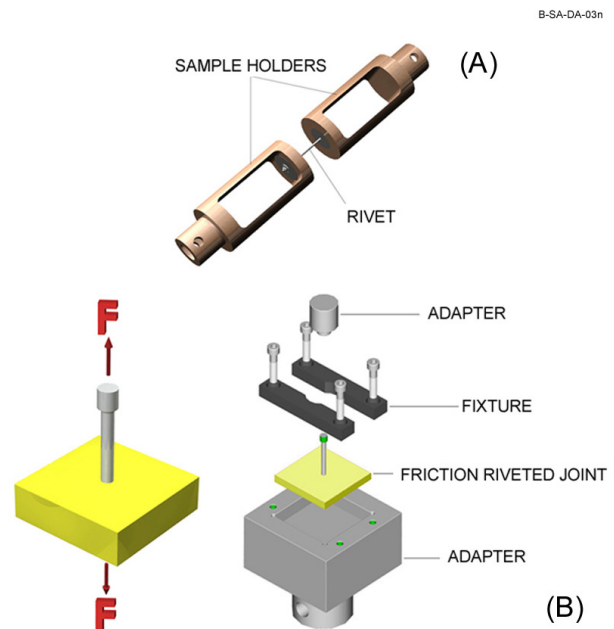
A) Schematic representation of tensile testing in M5-metallic rivets. B) Scheme of T-Pull tensile testing in friction riveting joints.
